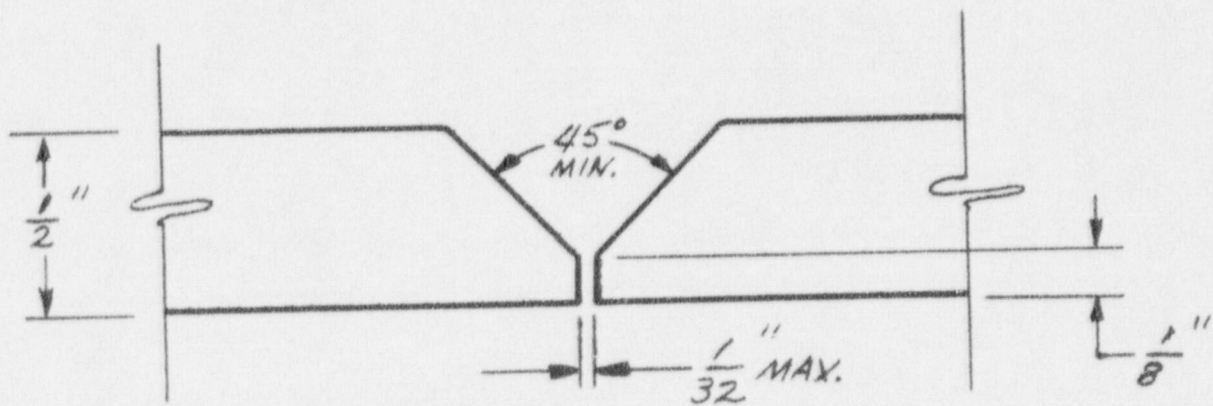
PROPER GAP INTERVAL TO MINIMIZE INCOMPLETE PENETRATION IN GMA WELDS
